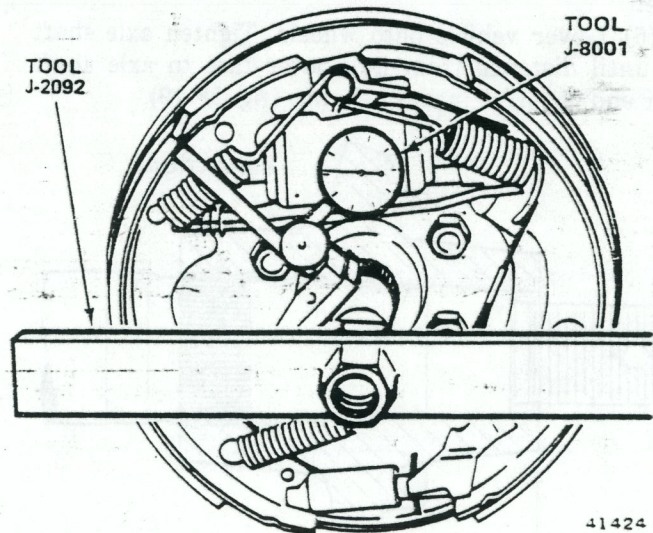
F-23 Measuring Axle Shaft End Play—CJ Models
